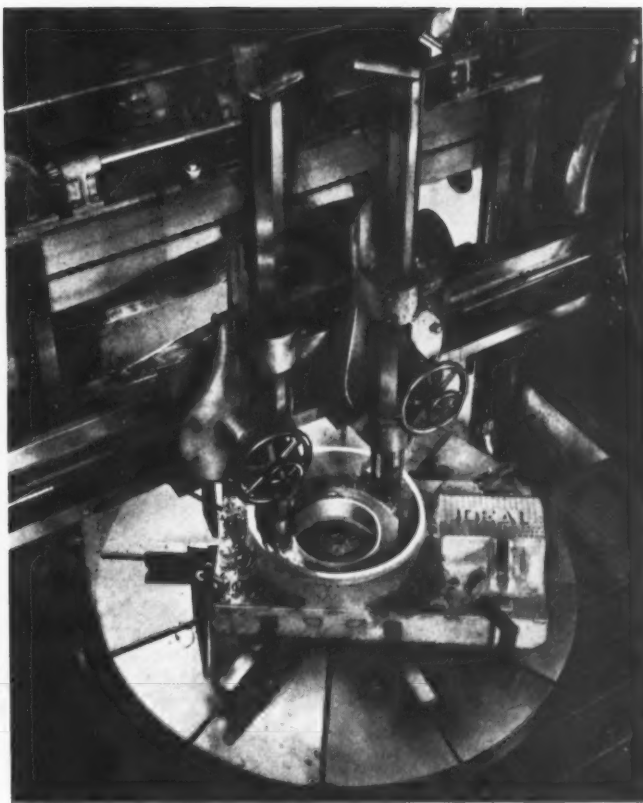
Unusual Accuracy is Required in Some of the Boring Operations Performed on Large Castings for Oil-well Equipment
